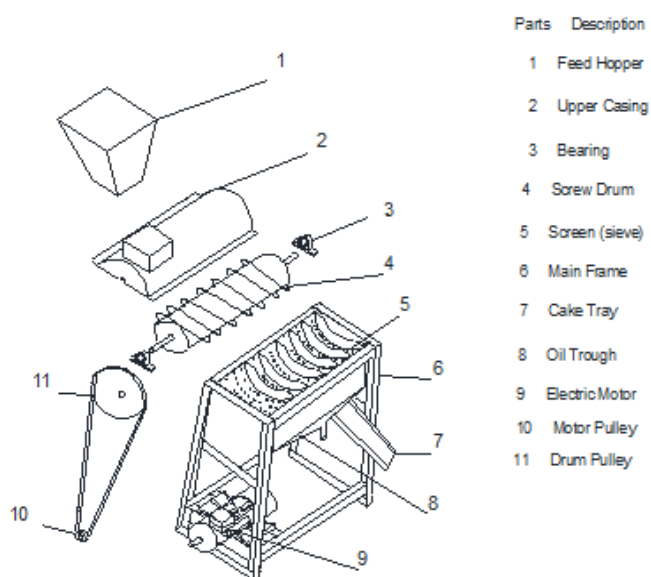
Exploded Drawing of the Fish Oil Extracting Machine
